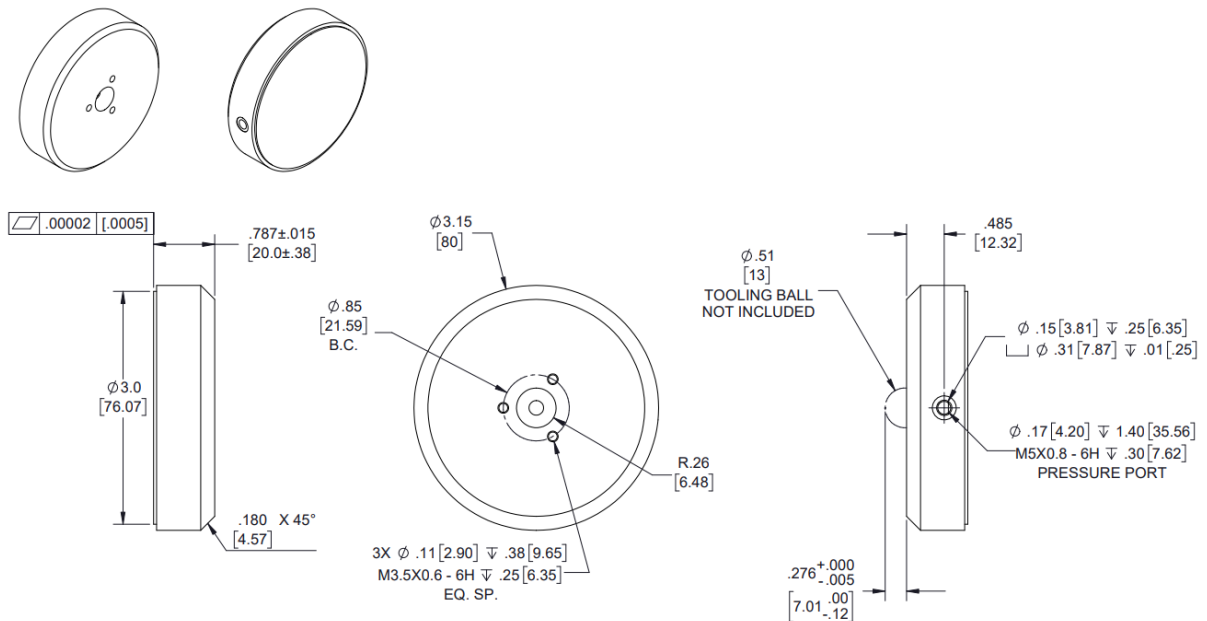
A technical drawing of an 80 mm flat round air bearing [22].
